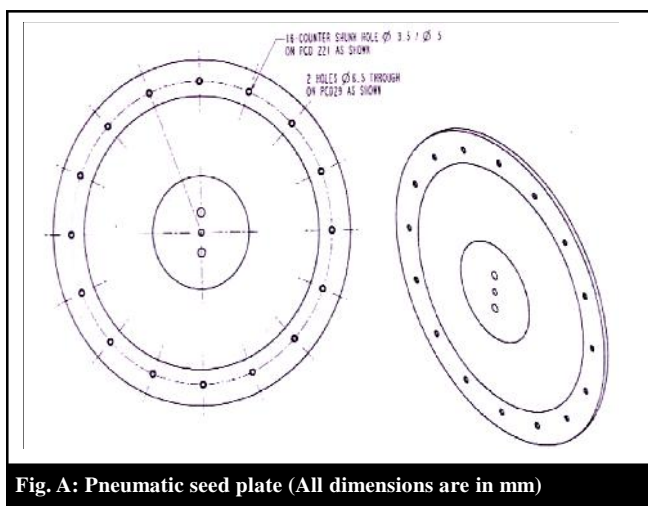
Fig. A: Pneumatic seed plate (All dimensions are in mm)
